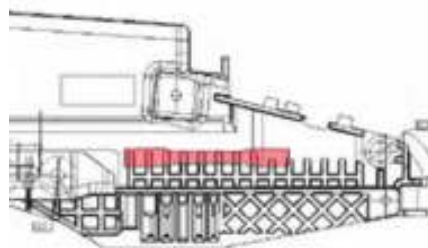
positioning of the tensile specimen of the carrier capote.
